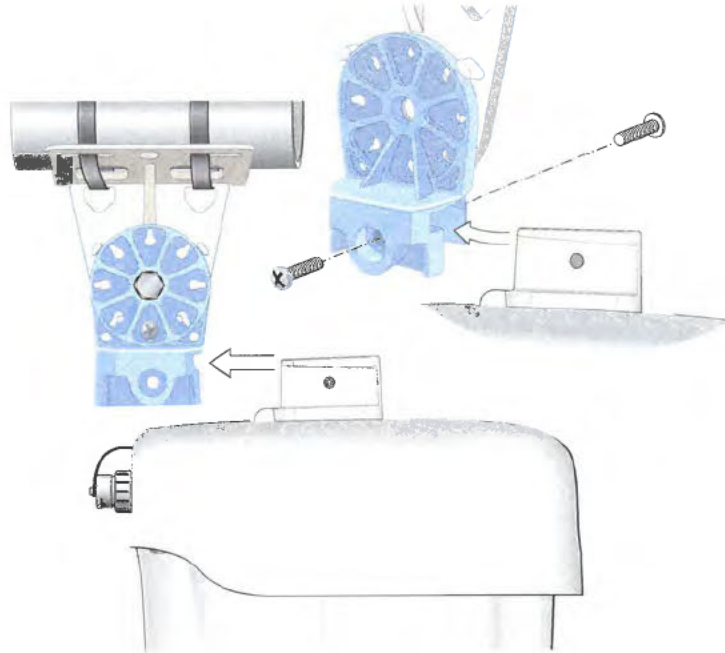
Attaching the AP to the Mounting Holder (Completed)
